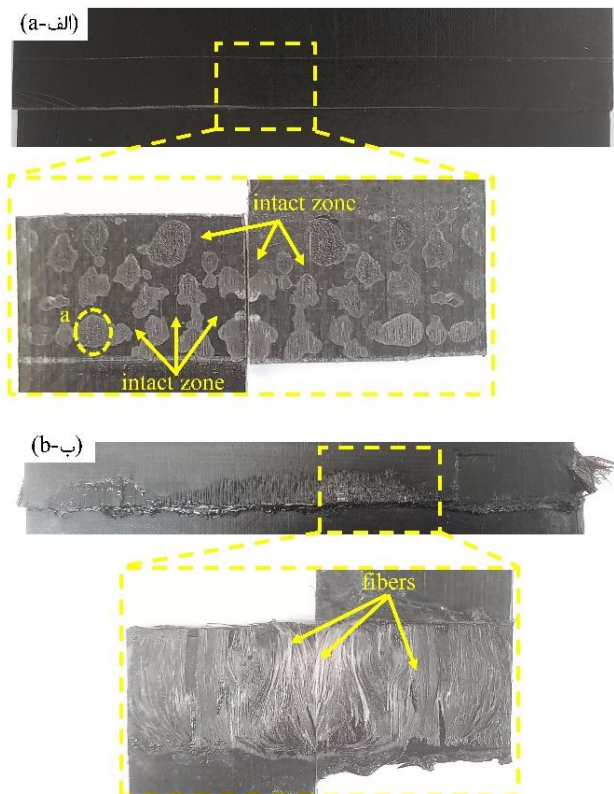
Weld line and a sample of its fracture surface. (a): Test number one, power 600W, pressure 2bar and speed 20mm/s. (b): Test number two power 1200W, pressure 2bar and speed 20mm/sec.
